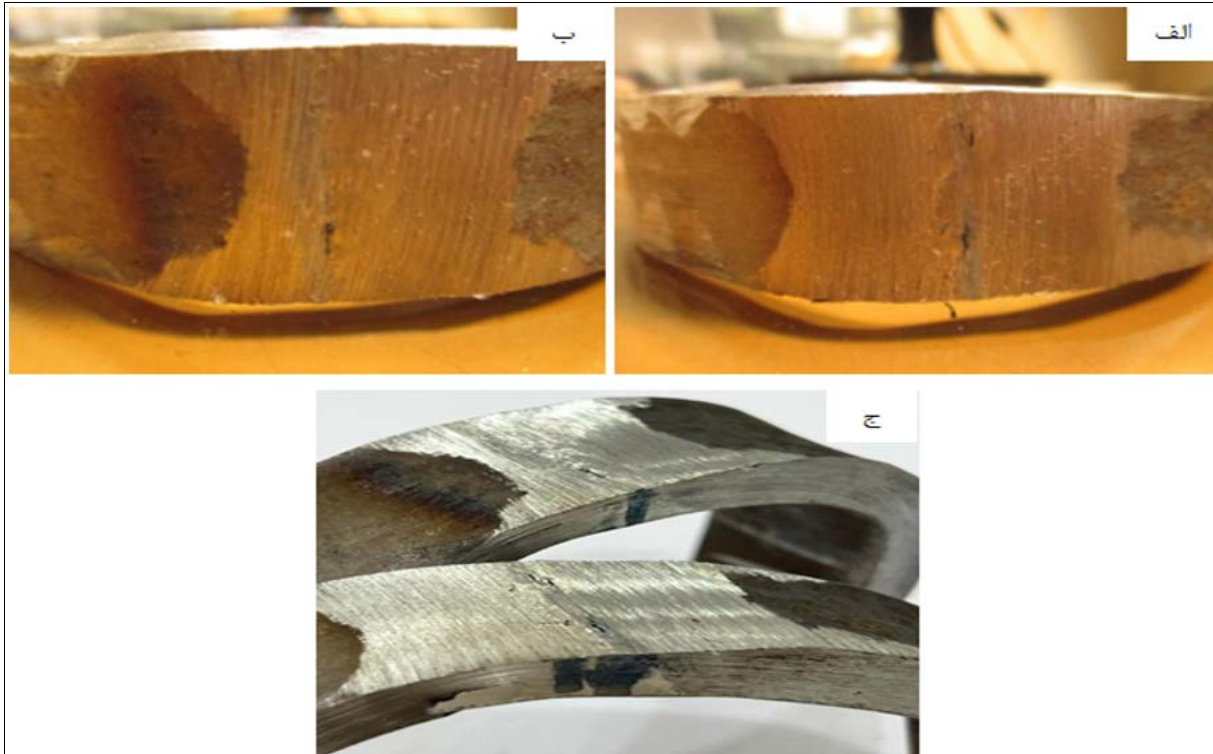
Bending Test Results for Welded Samples (Macroscopic examination of bent samples reveals cracks in the weld metal for ER NiCrMo-3 filler metal (ا), originating from the root area, with varying crack lengths. In contrast, the sample welded with ER 309L filler metal (ج) remained free of cracks and defects, demonstrating superior mechanical integrity and resistance to bending deformation.
